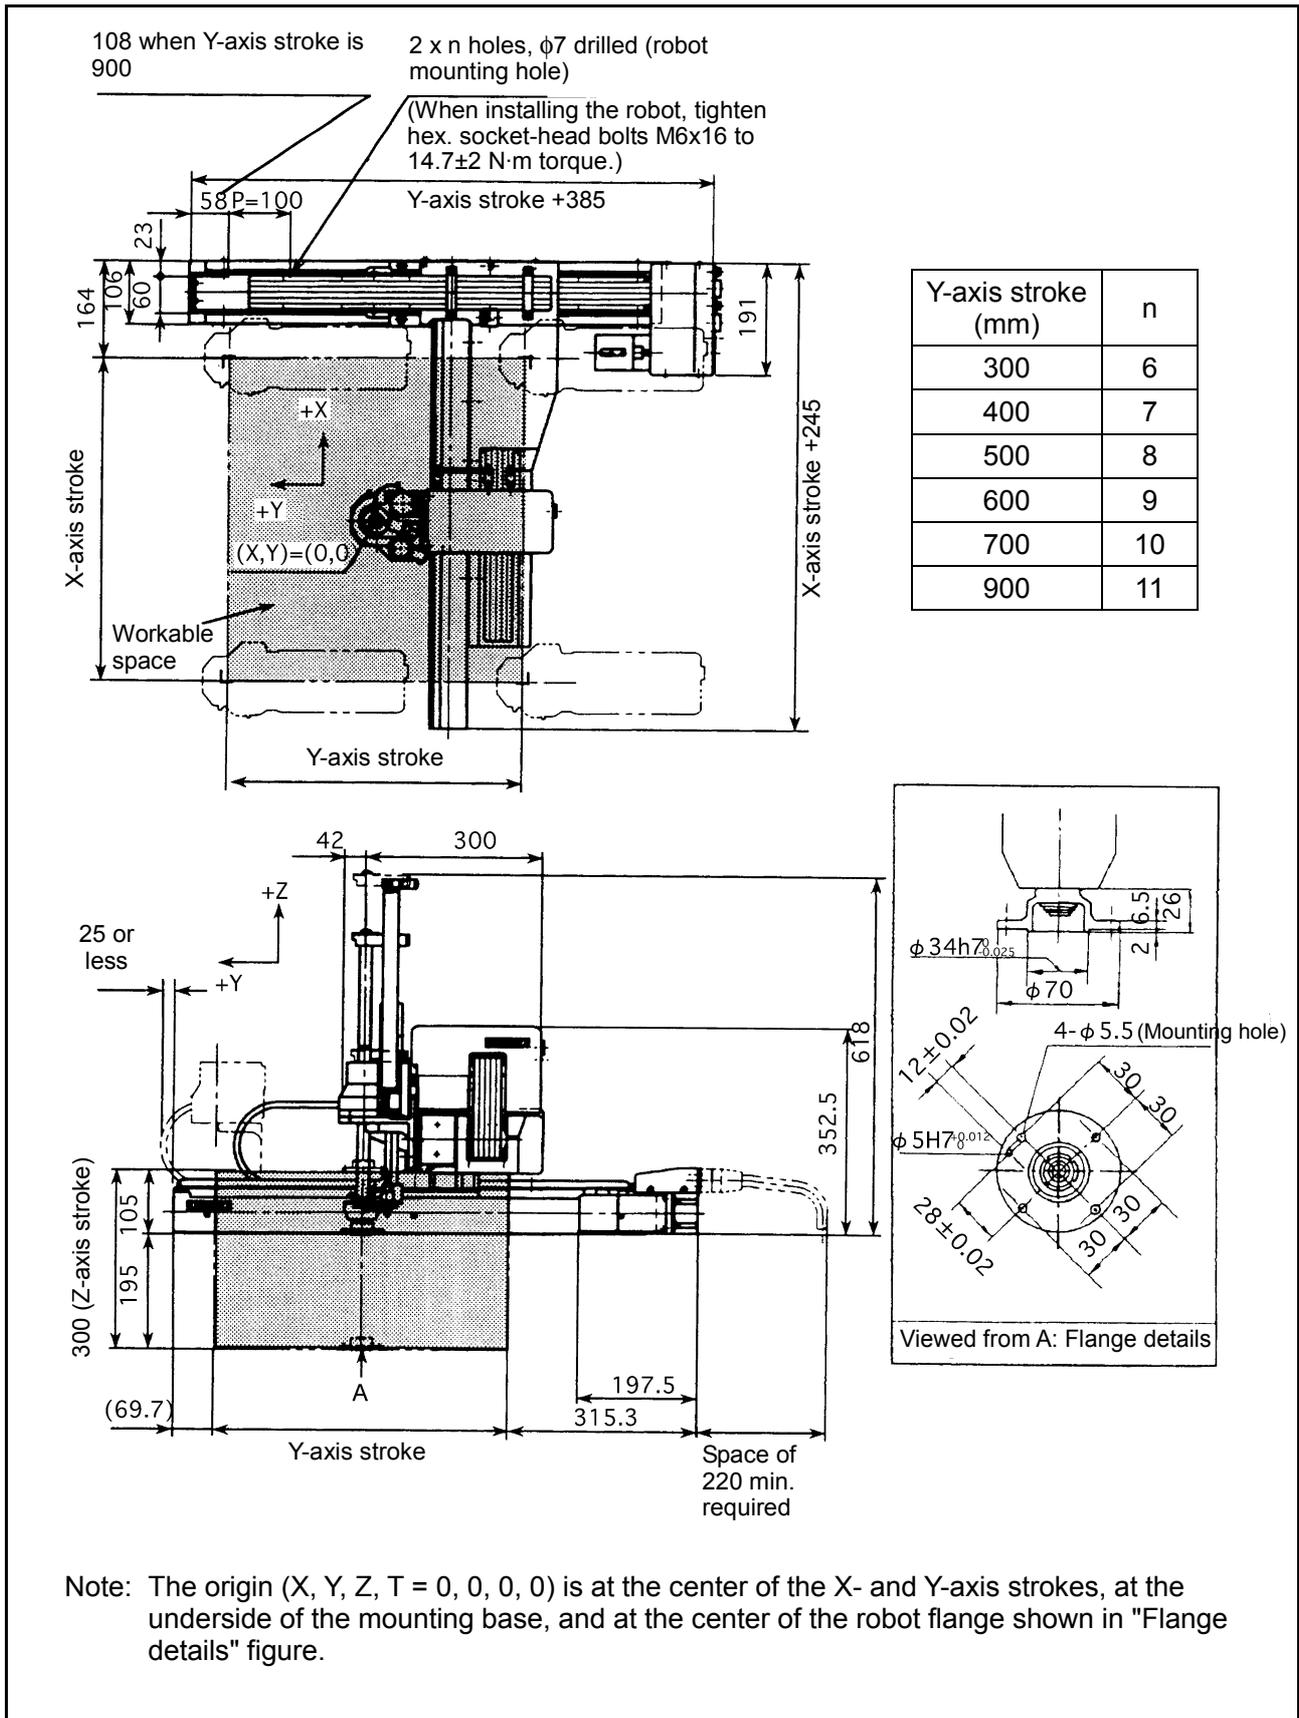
(c) Outer Dimensions and Workable Space of the XYC-40\*\*3D-L
